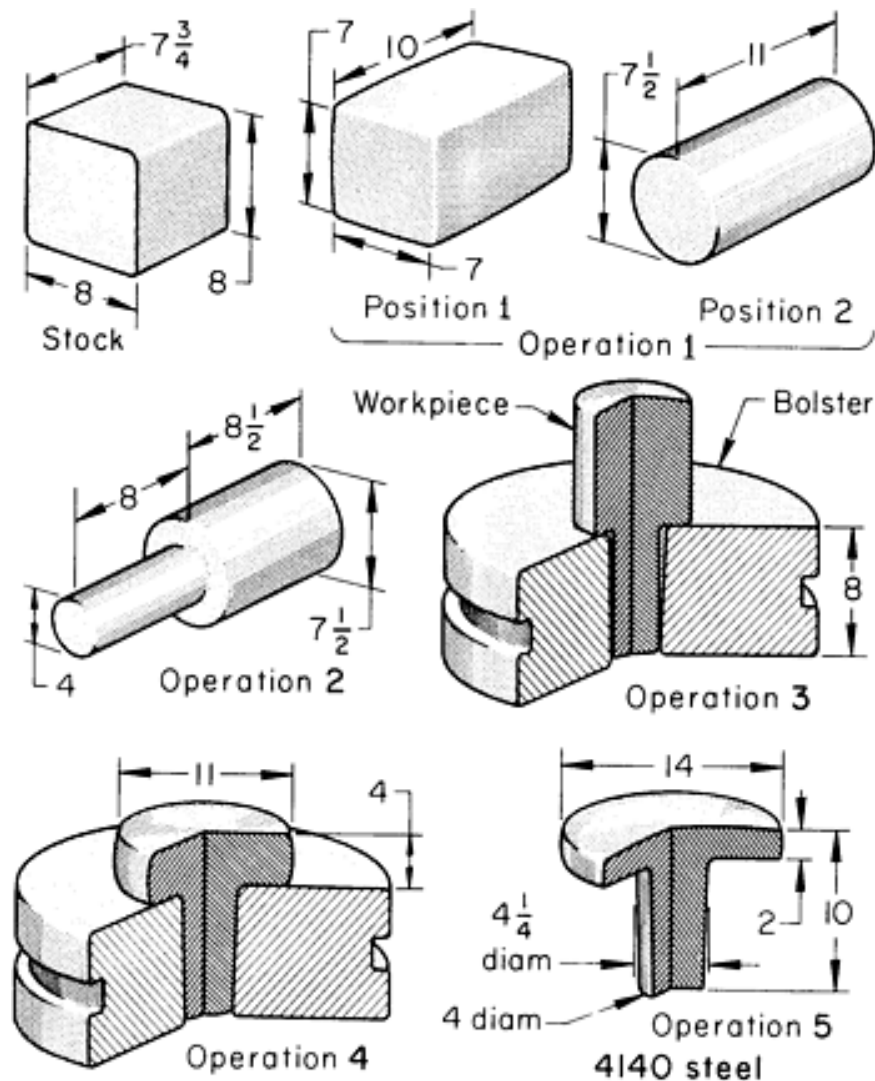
Typical procedure for the forging of a gear blank and hub in open dies, featuring the use of a bolster. Dimensions in figure given in inches.
